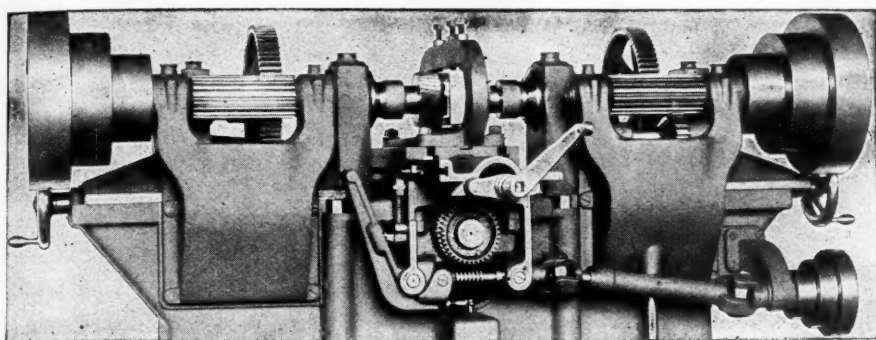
DUPLEX DOUBLE-COLUMN MILLING-MACHINE.
